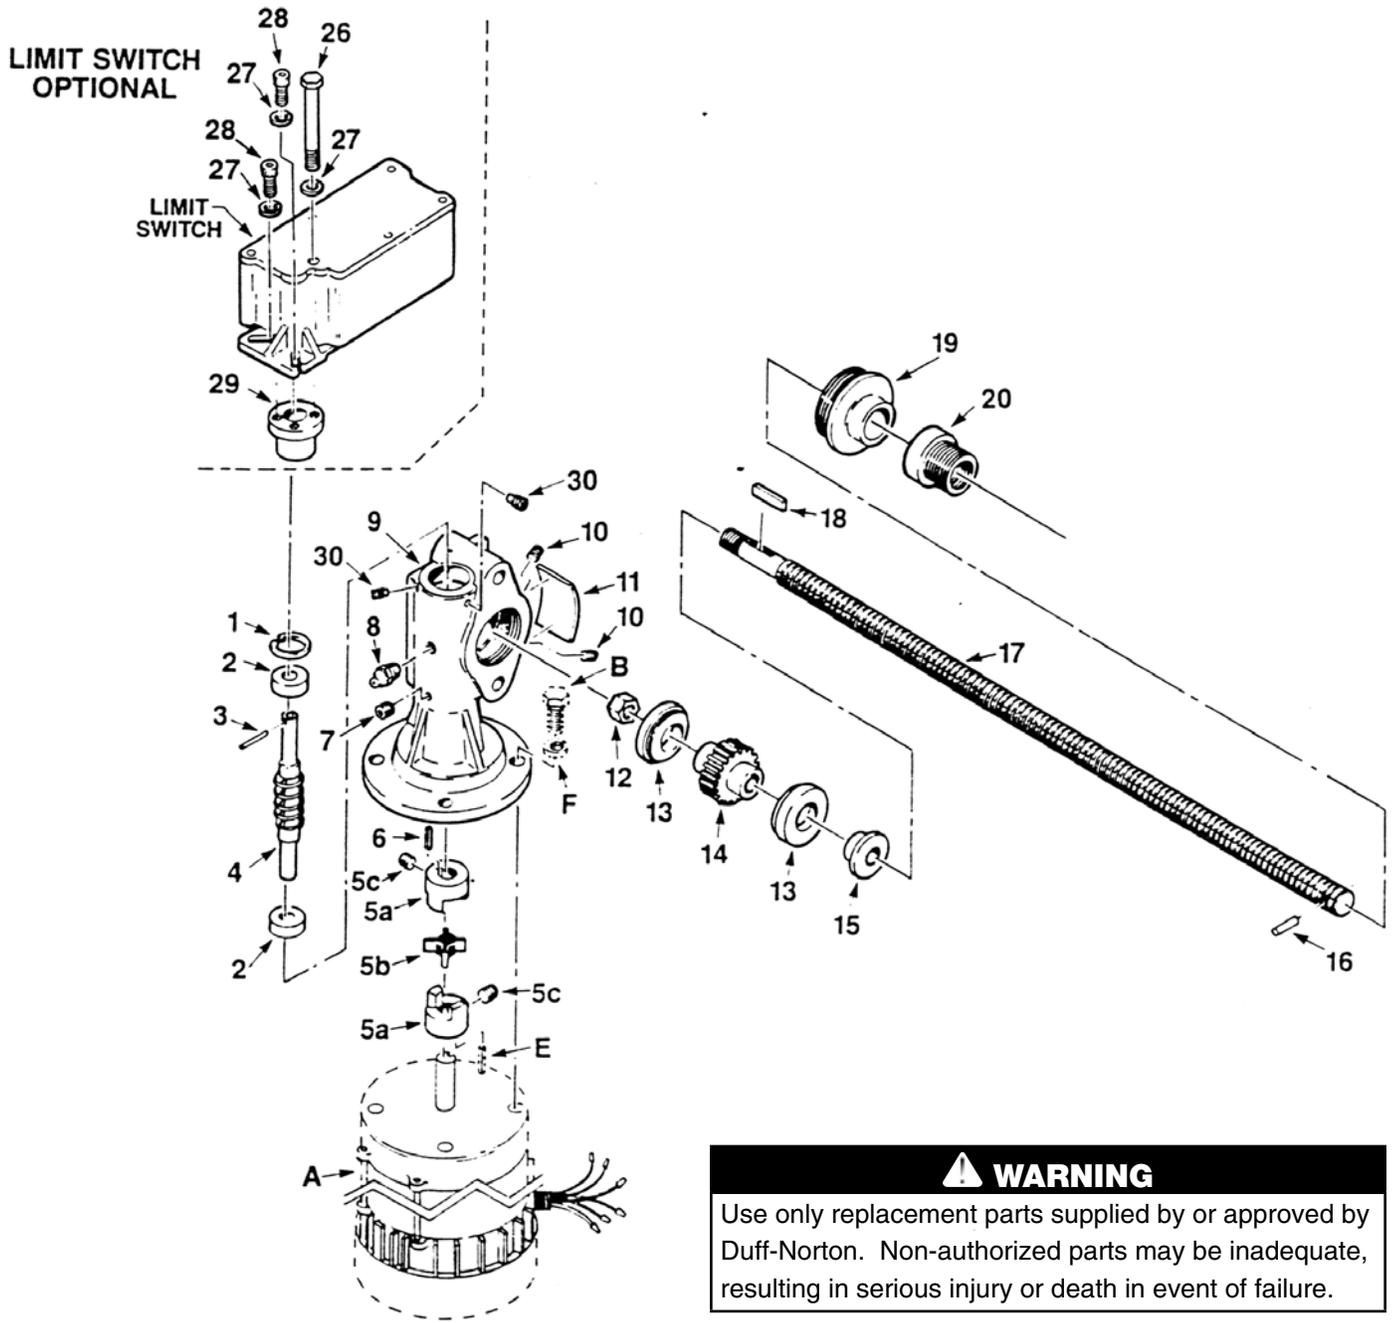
Exploded Illustration Rotating Screw Modular Actuators (Models M-2464 and M-2465)
